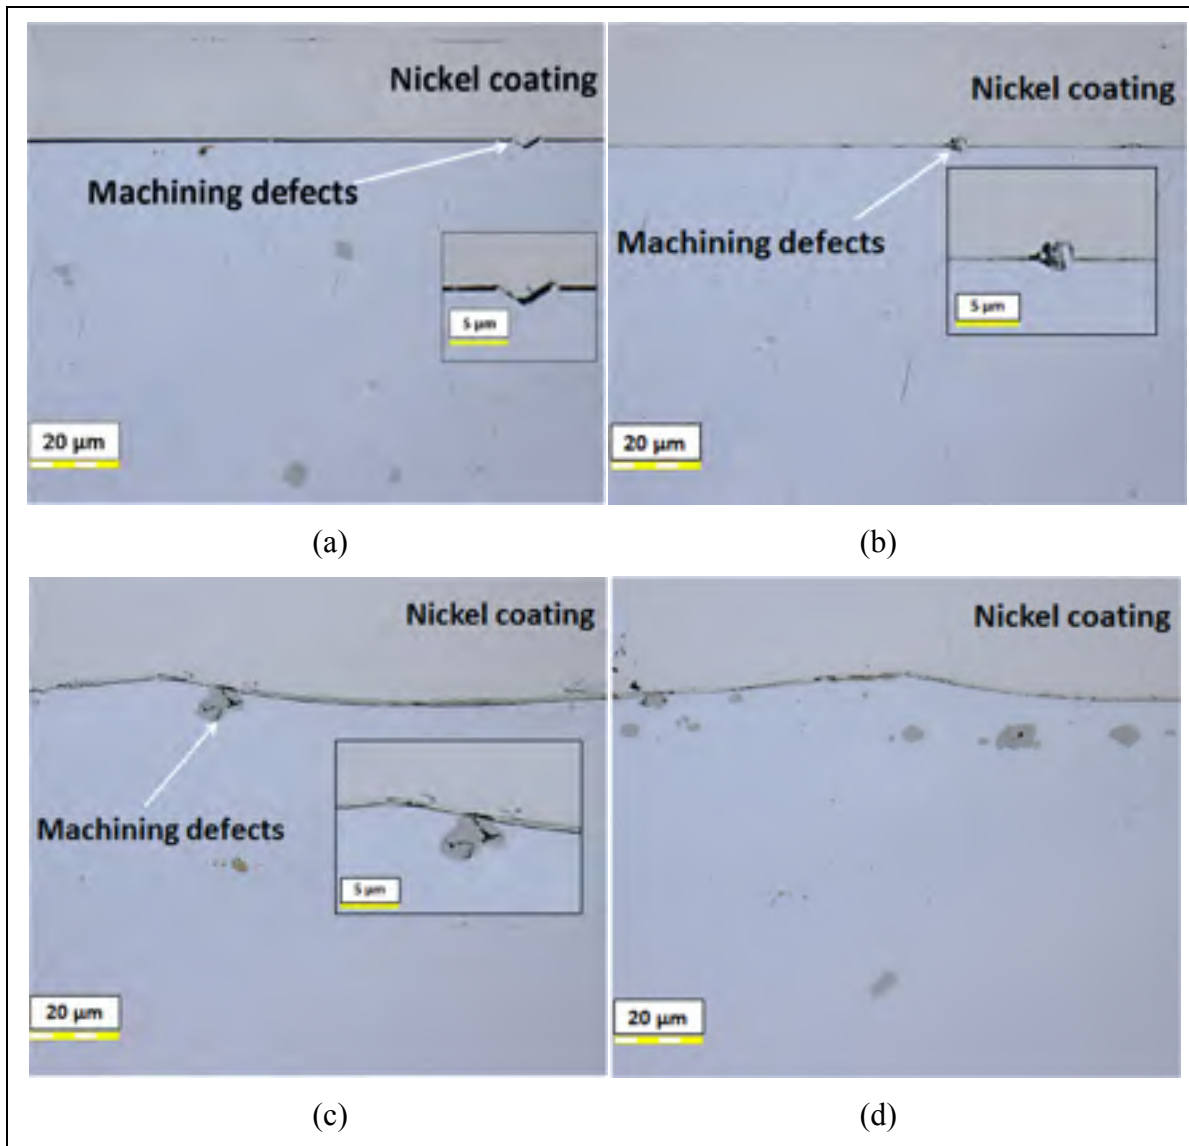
Machining defects and related zooms: (a), (b) following the cutting and (b), (c) following the feed direction
